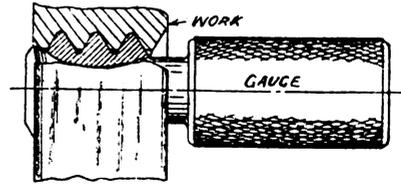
Showing Clearance at Bottom of Spaces in Plug Gauges to clear Flat Tops of Work Threads
